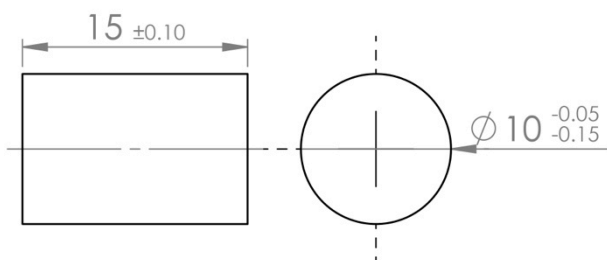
Case study geometry (dimensions in millimetres). Since the material is porous, the dimensions refer to the circumscribed geometrical entities.
